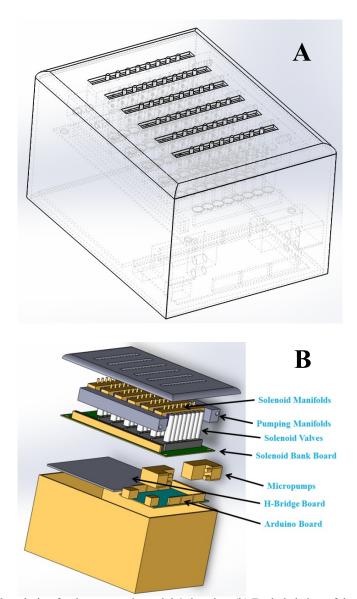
(a) Incomplete design for the pneumatic module's housing. (b) Exploded view of the pneumatic module.
